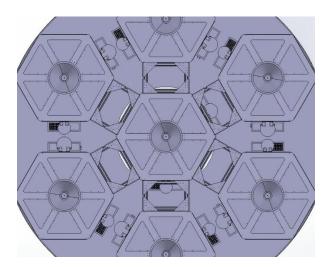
VASIMR Assembly Front View with T-Slot Beams
